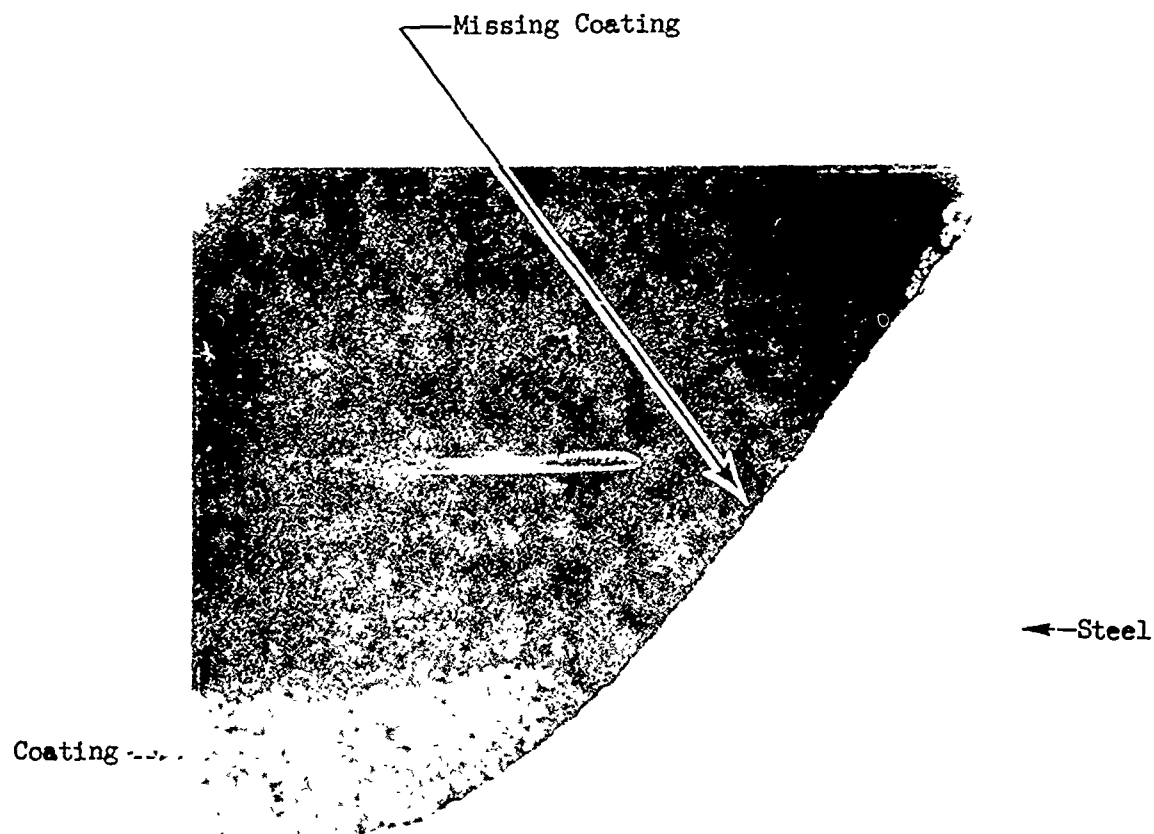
BOLT'S THREAD, MINOR DIAMETER COATED WITH SERMETEL W,
